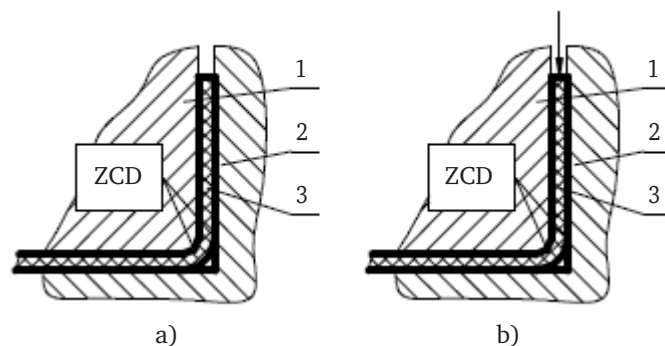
Characteristic zones of damage to the coatings of the workpiece during bending: 1 – punch; 2 – matrix; 3 – workpiece; ZCD – zone of coating damage
